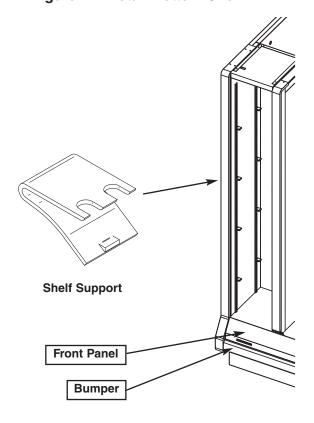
Reinstall Front Panel, Bumper and remaining Shelf Supports
